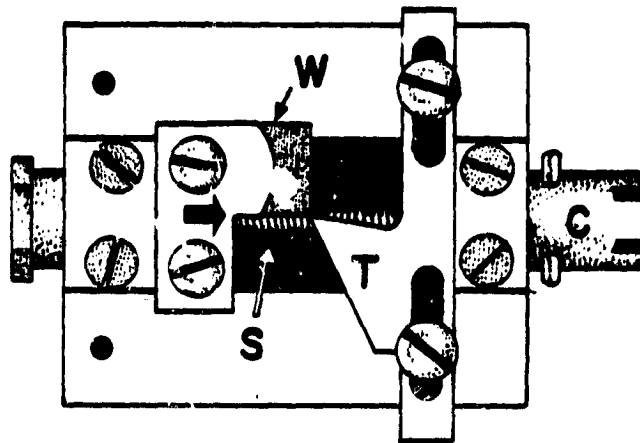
Metal Cutting Deformation Stage Used for In-Situ Cutting T = Cutting Tool; W = Workpiece, C = Connector for Drive Rod That Operates Lead Screw (S) Which Advances the Workpiece in the Direction of the Arrows into the Tool, Thereby Producing a Chip
